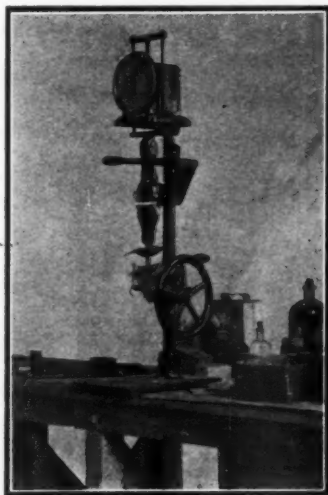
CORE TESTING MACHINE WITH AUTOMATIC REGISTERING DEVICE.
